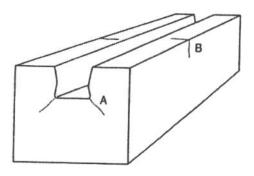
Typical cracks that may form during cast iron sealing of collector bar. (A) Wing crack and (B) Corner crack<sup>1</sup>.
